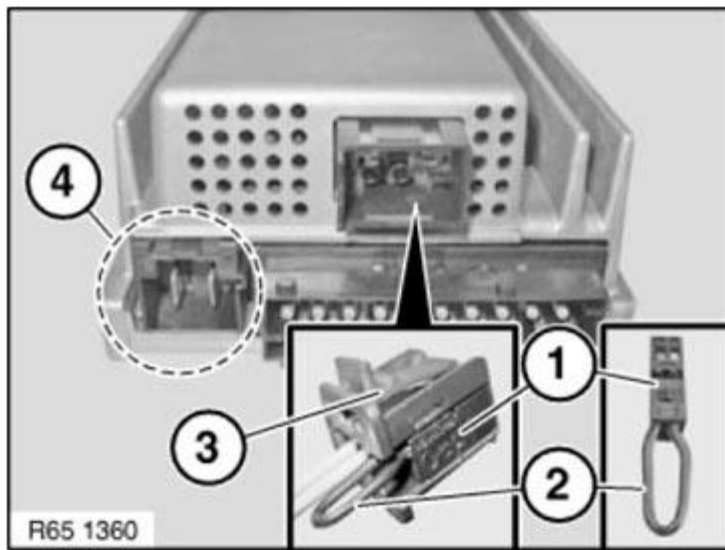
Identifying Wire Jumper, Socket, Connector, And Connector Chamber
